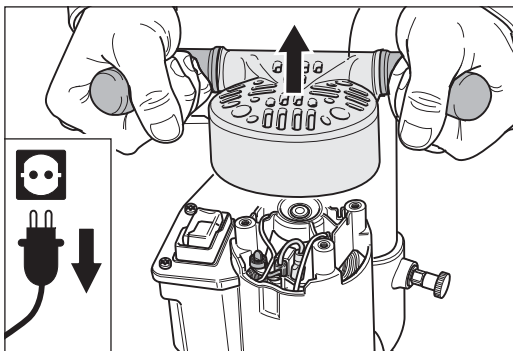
Remove the handle. Make sure that no parts fall into the motor!
